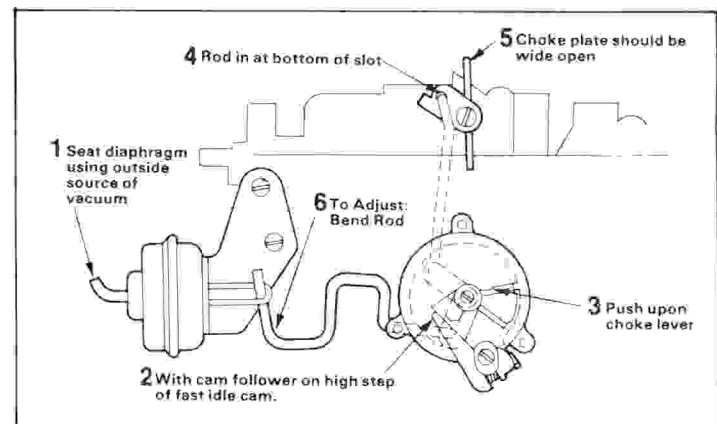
VACUUM BREAK ADJUSTMENT (Rear 454° Eng.)
